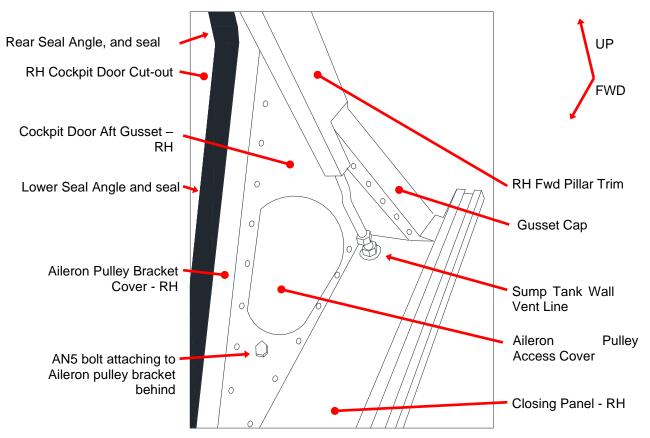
Cockpit Door Aft gusset - Component Removal at Rib 5 RHS
